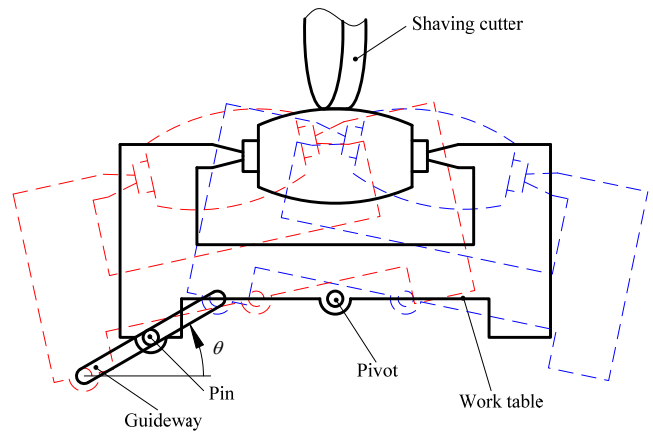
Crowning mechanism of the traditional gear shaving machine.
